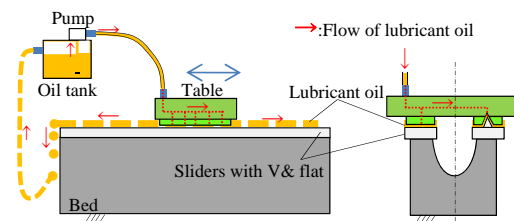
Schematic view of a conventional lubrication of machine tool sliders
